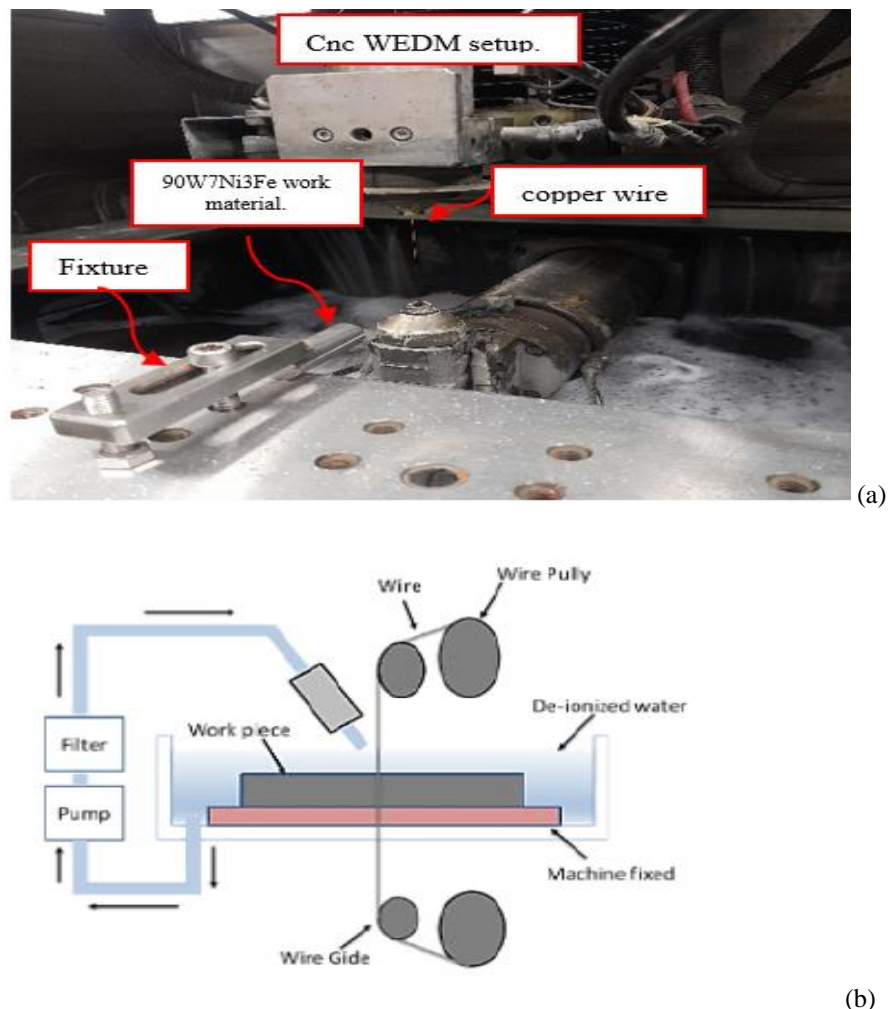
(a) Actual and (b) schematic Wire electric discharge machining
